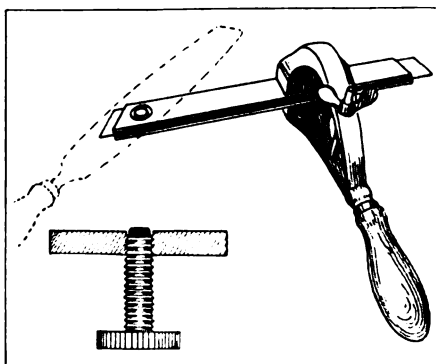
A Home Made Set of Simple Jigs for Cleaning Platinum Points Quickly and Accurately.
